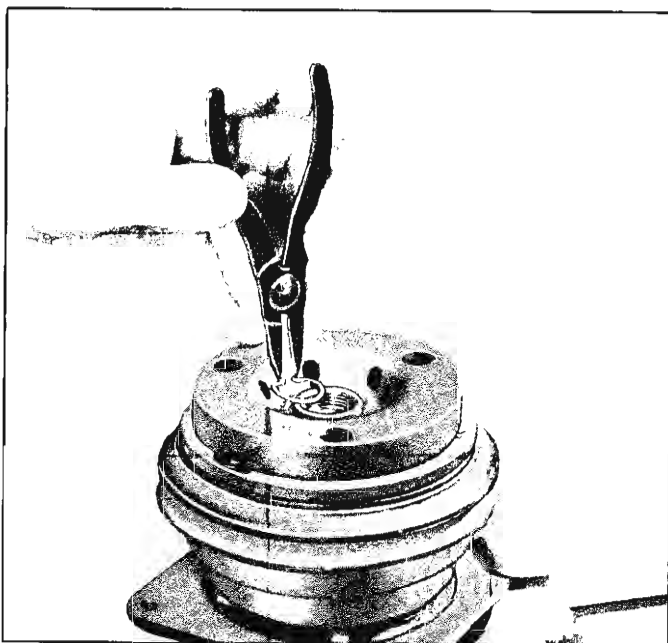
Removing Pulley and Bearing Assembly Retainer Ring
